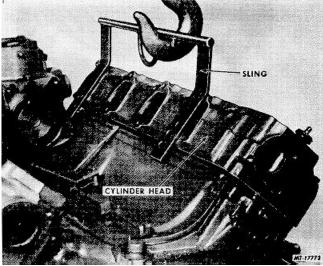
Removing Cylinder Head NOTE If necessary, modify lifting sling SE-1896 as follows:
